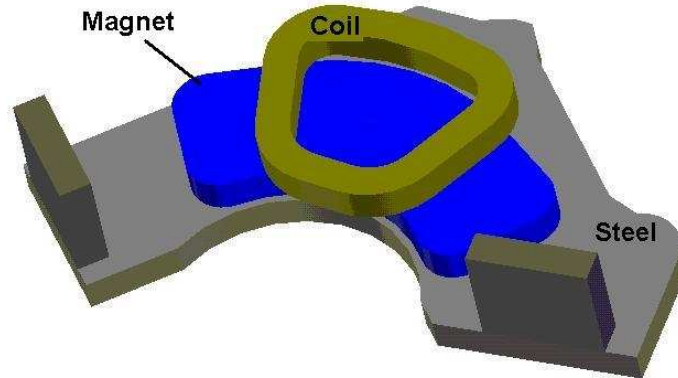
Distributed actuator geometry showing bottom half with coil
